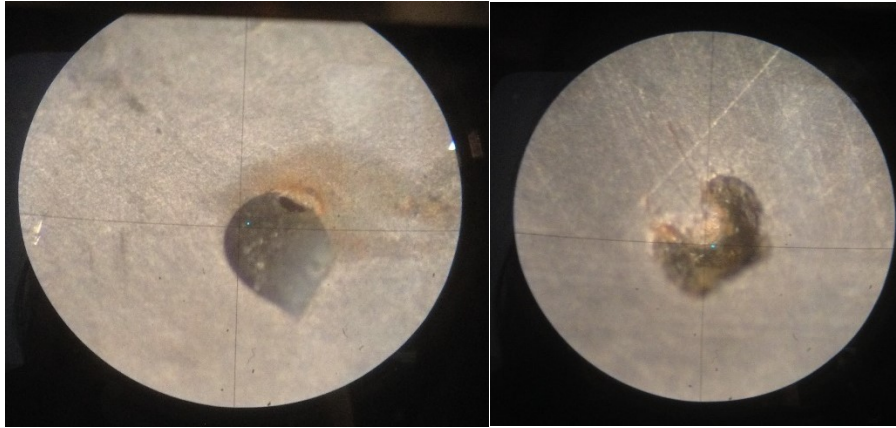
Microscopic image of the cracks in the welds of S500-2R and S500-3R (not in scale)
